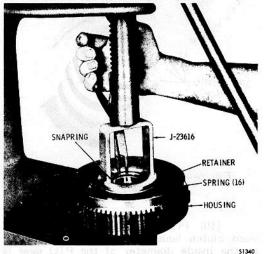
Removing (or installing) fourth clutch spring retainer snapring
